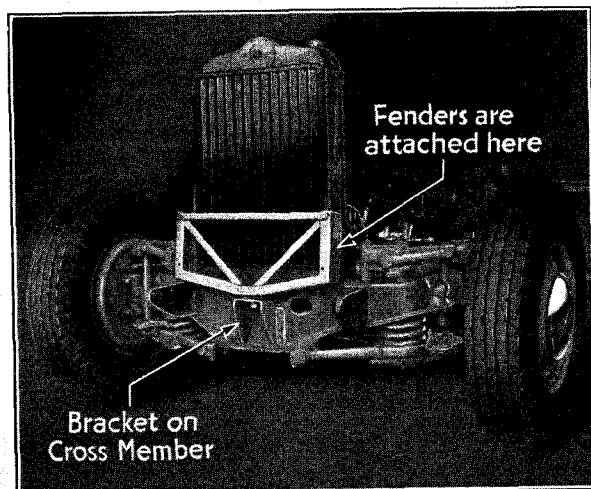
Radiator Mounting, Series 37-65, 70, 75, 85
